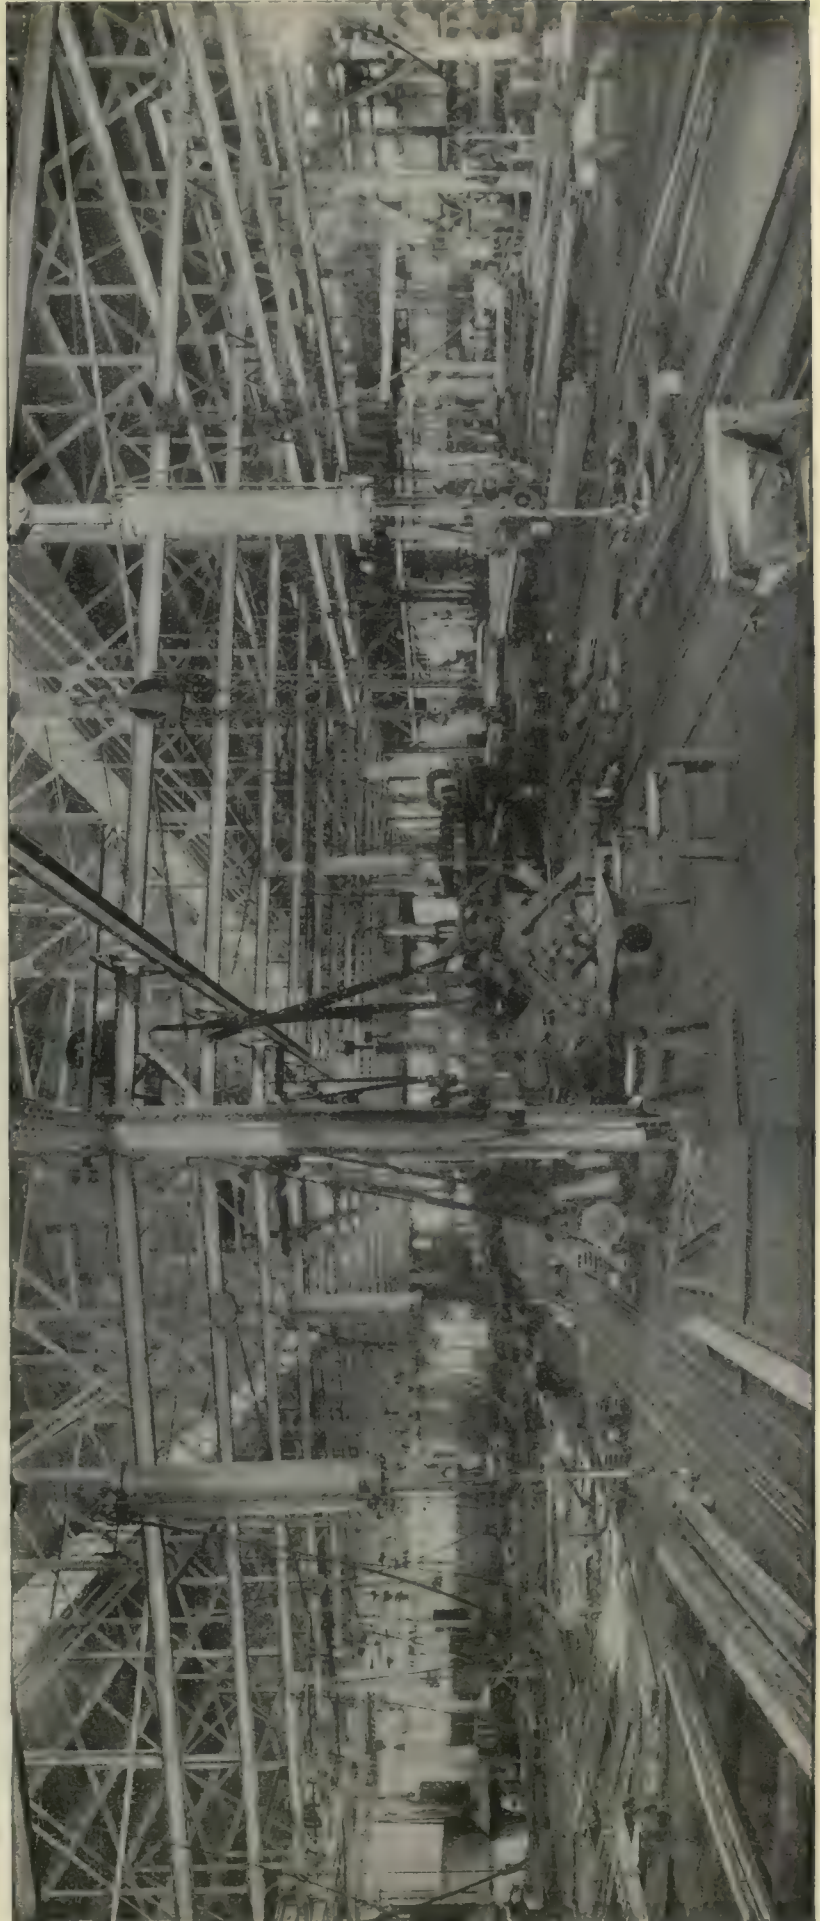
Hamilton Bridge Works Co., Interior Bridge Shop.
